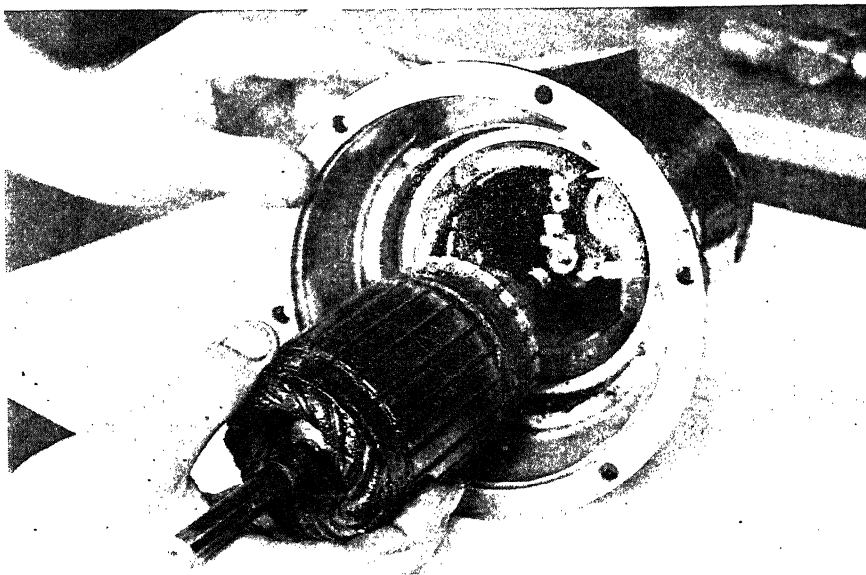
WITHDRAWING THE ARMATURE OF THE E160 STARTER
